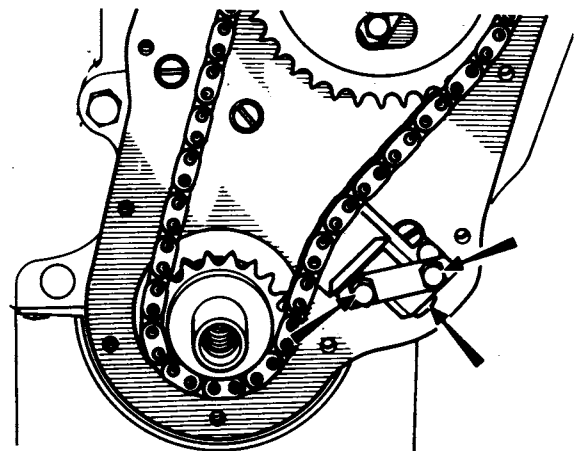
REMOVING TIMING CHAIN TENSIONER
